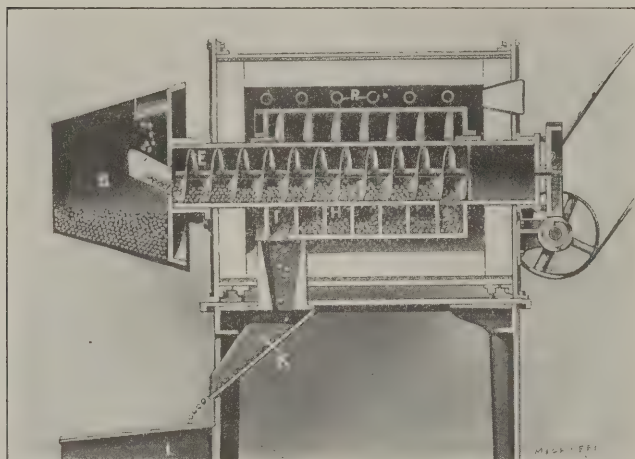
Section of Ball Heating Furnace, made by the American Gas Furnace Co.
